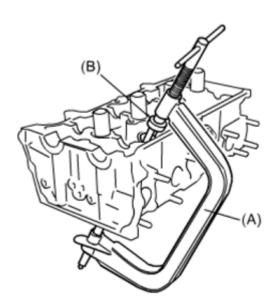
Compressing Valve Spring Courtesy of SUZUKI OF AMERICA CORP.
